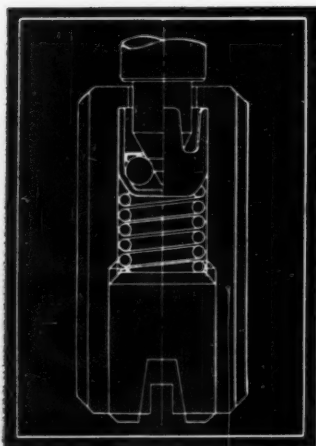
Instrument ball bearing, loaded by spring, compensates for float and wear of shaft
